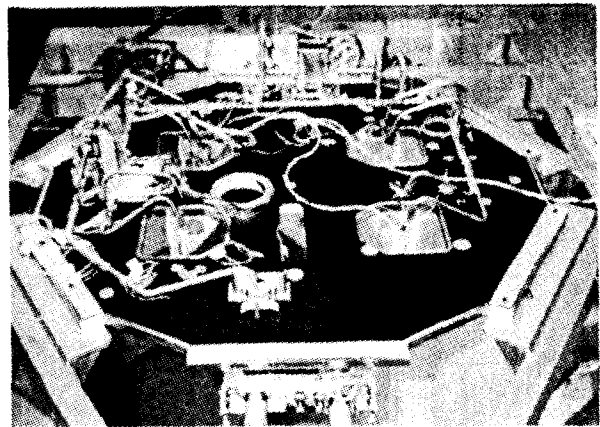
Welded propulsion components except propellant tank and dual thruster module
